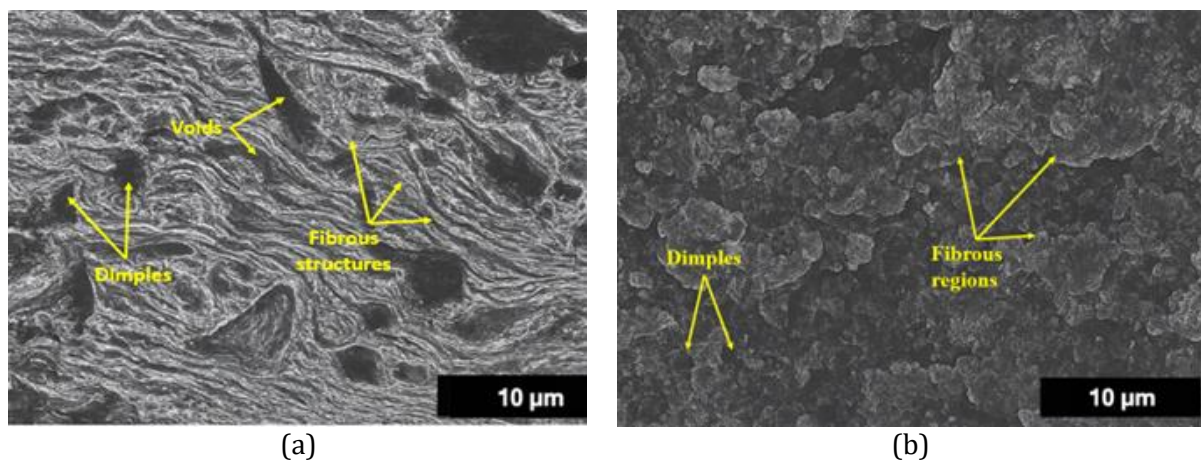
Fractographic images (a) AW tensile sample (b) PWHT tensile sample
